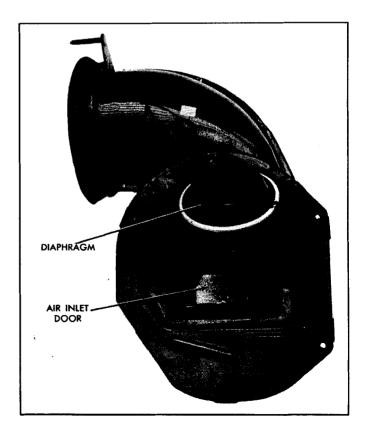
A-39 A and G Series Typical Air Inlet Assembly
